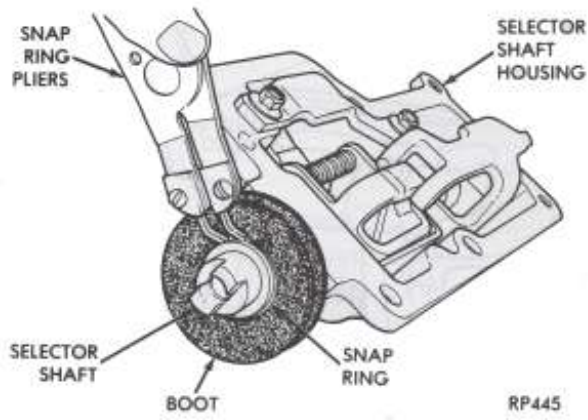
Remove or Install Selector Shaft Snap Ring and Boot
